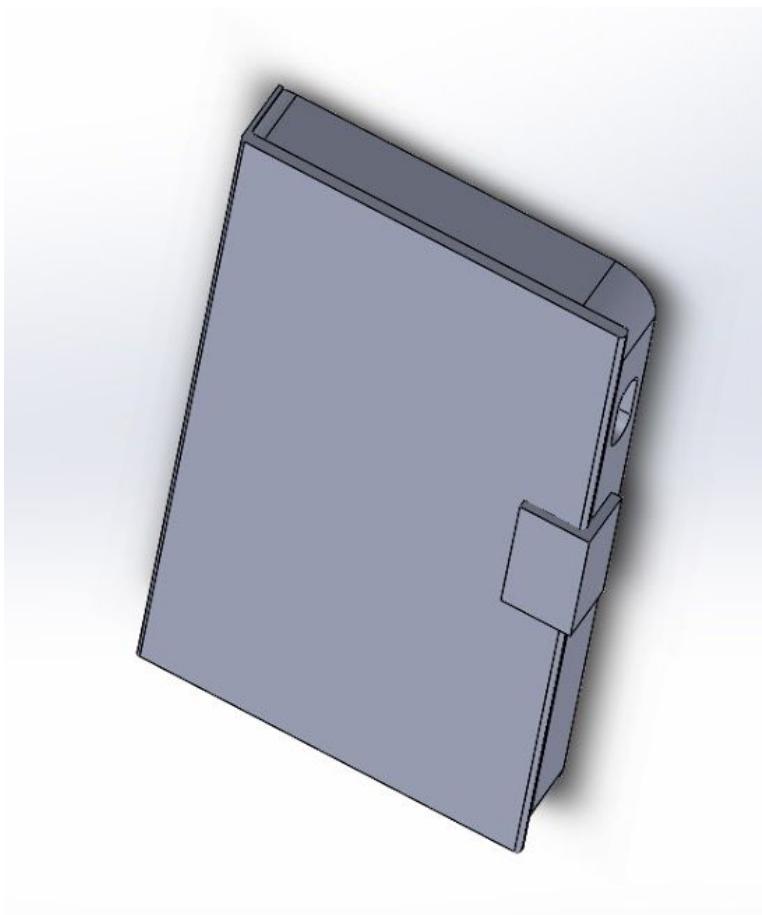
Solidworks Assembly of the Faraday Case Prototype 3.0
